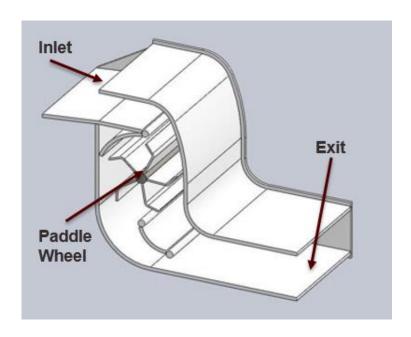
Structure of the Final Paddle Wheel Prototype (cutaway view)
